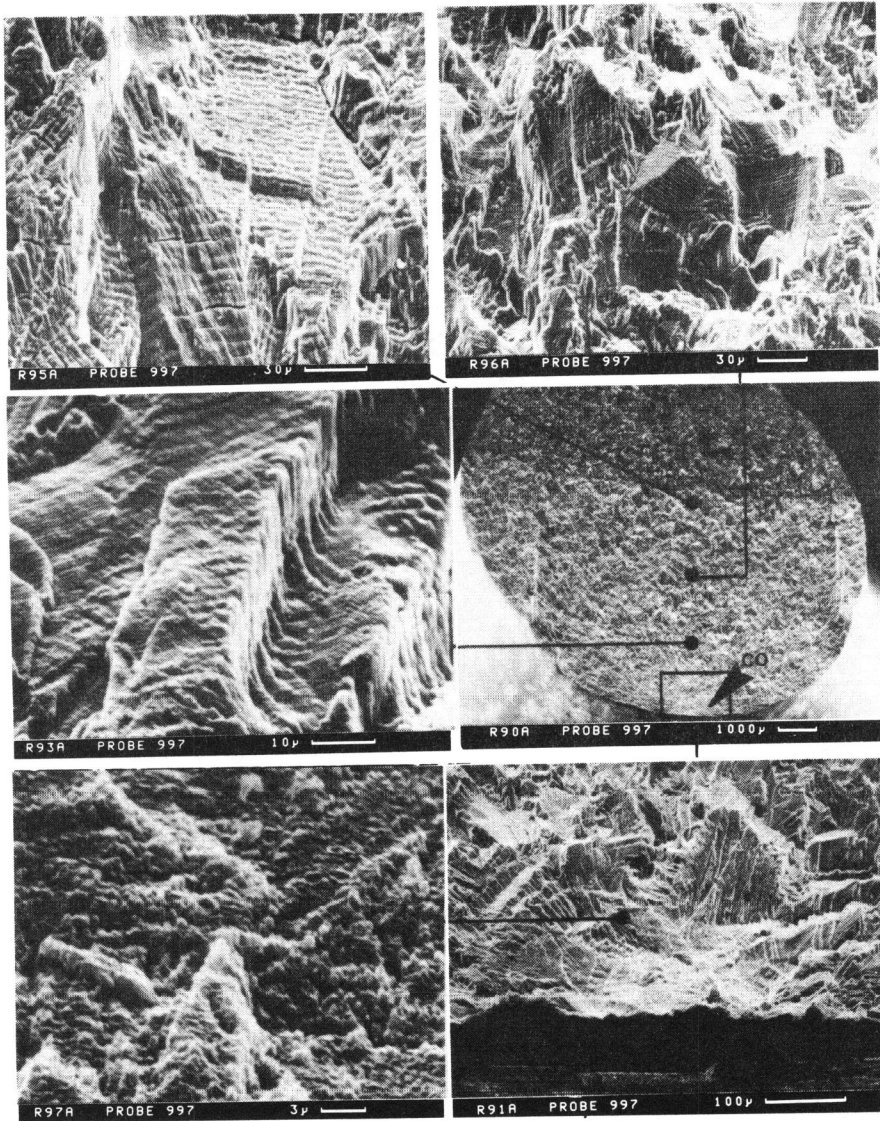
Nim 86, HCF-fracture, crack origin on the edge
